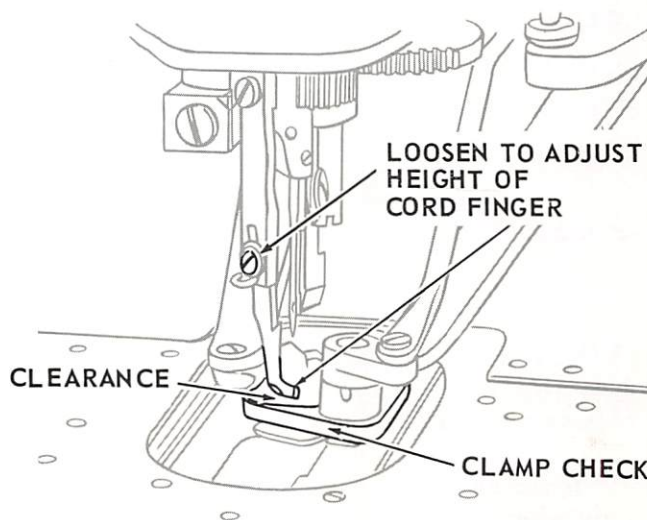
Cord Finger at Correct Height on Machine 271K4
